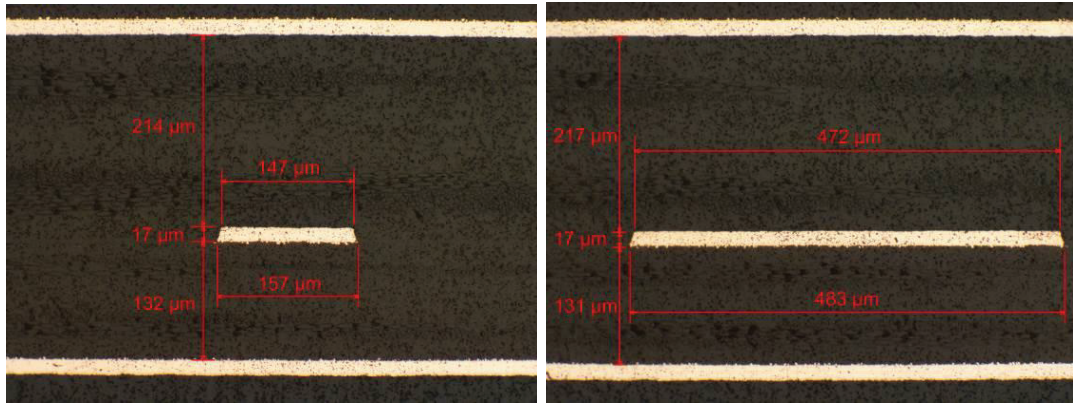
Cross-sections of the stripline Beatty standard PCB test board (different PCB from the one used for the measurements).
